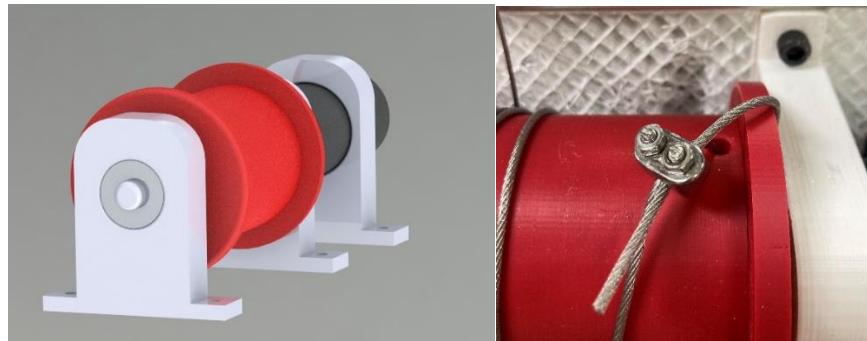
Cable spool frame attachment (left) and cable connection (right)
